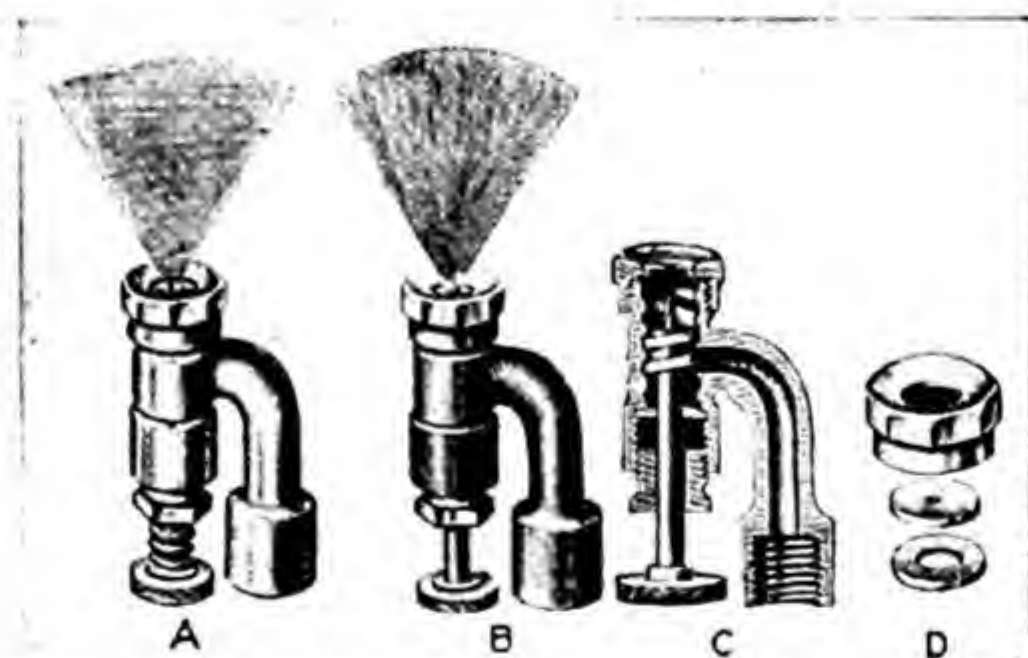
Vermorel spray nozzles: A, regular vermored nozzle; B, graduate vermored nozzle; C, sectional view of B; D, open cup, removal spray disc and packing ring for nozzle B.
